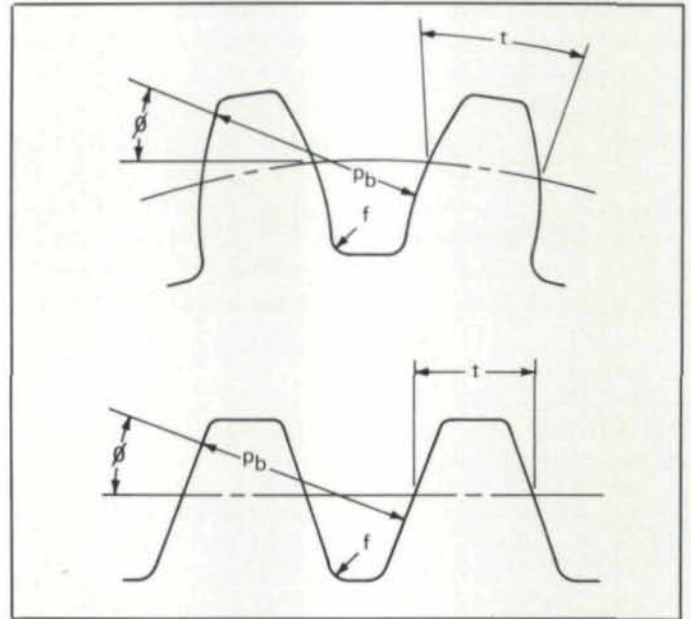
Since a circular involute gear is designed to the same parameters as the basic rack, it will roll freely with the basic rack and with any other circular gear using the same design system.
